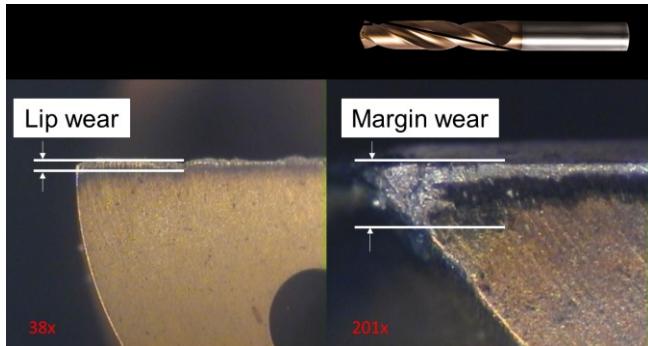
TOOL WEAR MEASUREMENT LOCATIONS
